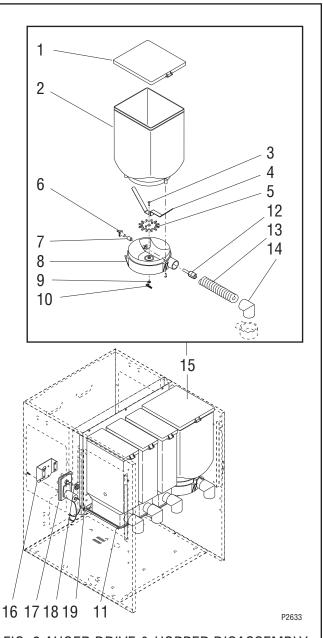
AUGER DRIVE & HOPPER DISASSEMBLY
